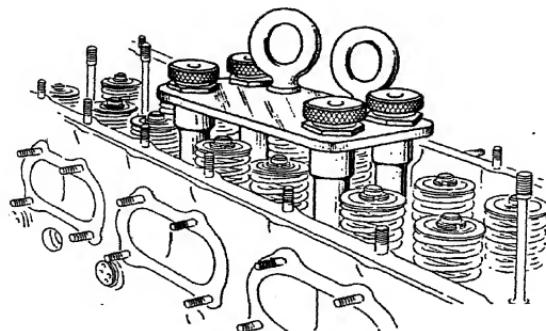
Plate and eyes for lifting cylinder blocks.
